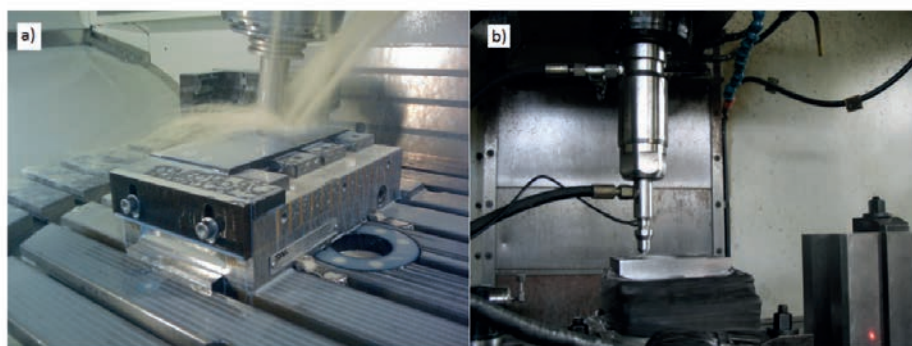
Preparation of test specimens for tests: a) profile milling with an inclined spindle on the machining centre DMG DMU 60 MONOBLOCK, b) finish burnishing on the three-axial centre MIKRON VCE 500
